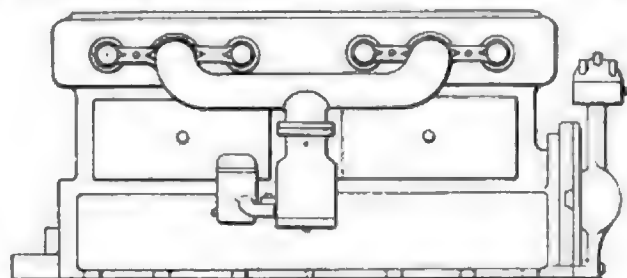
Ford block showing installation of built-up manifold, carburetor and ignition apparatus
